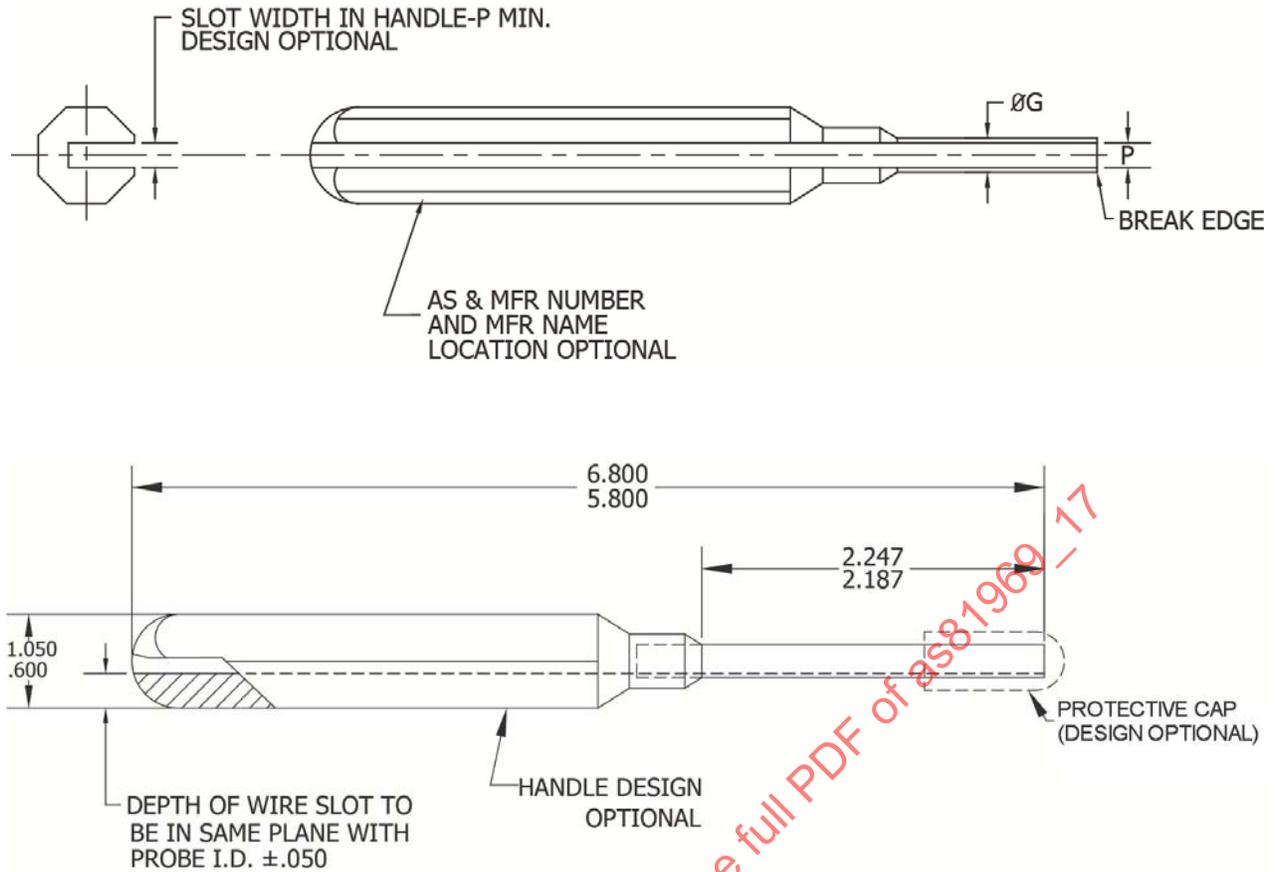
REMOVAL TOOL -06, -07, -08
